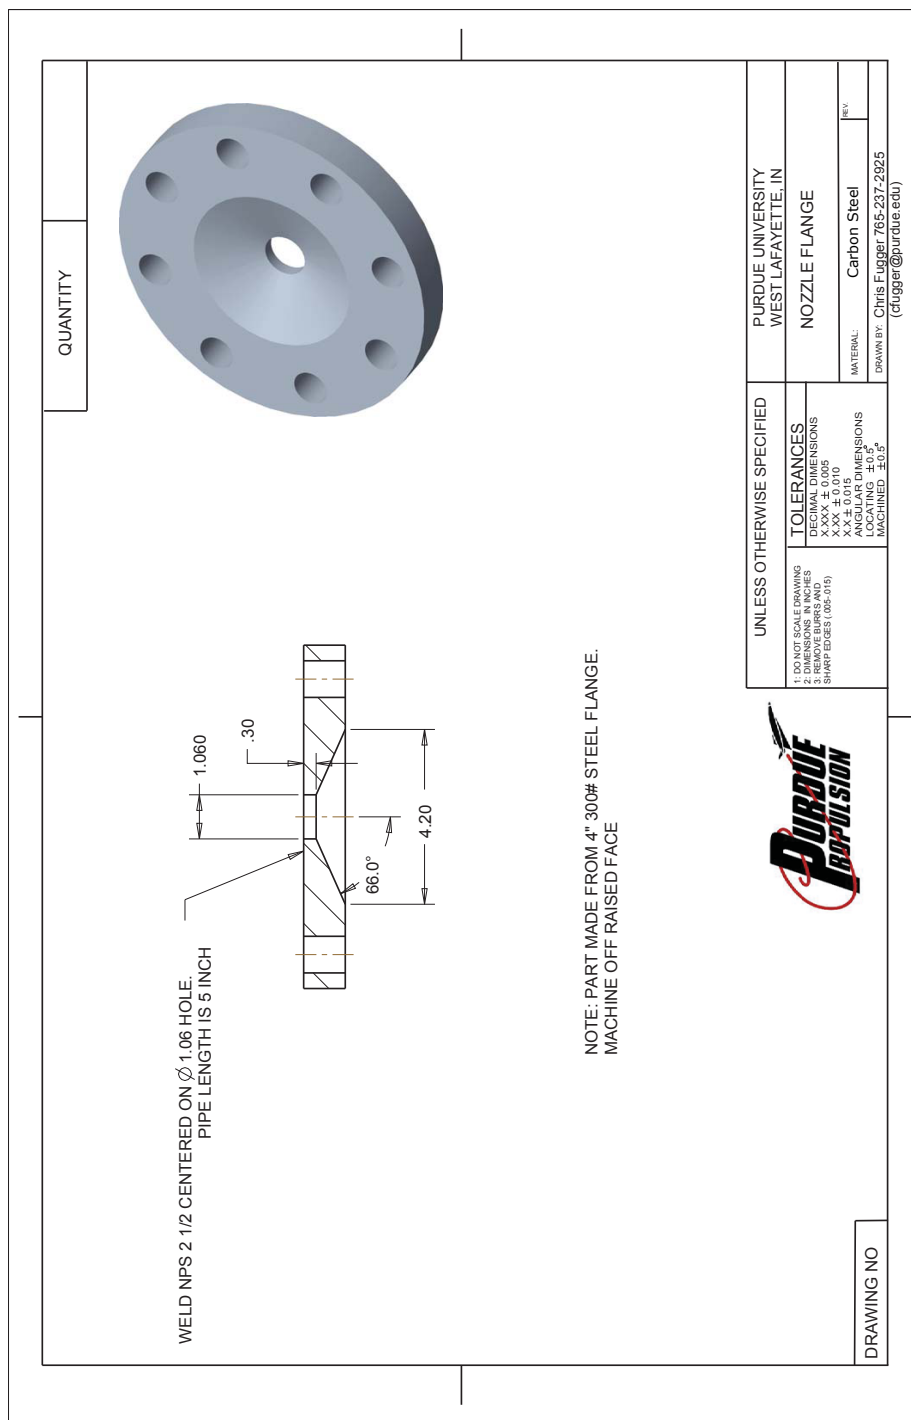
Machine drawing of the dump combustor exit nozzle.
